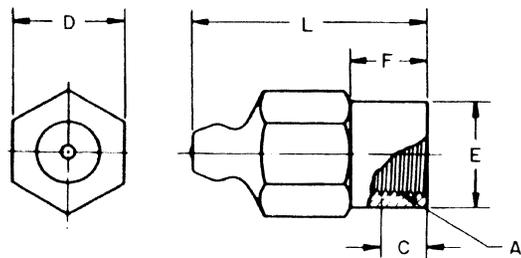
B—INTERNAL TAPER PIPE THREAD
